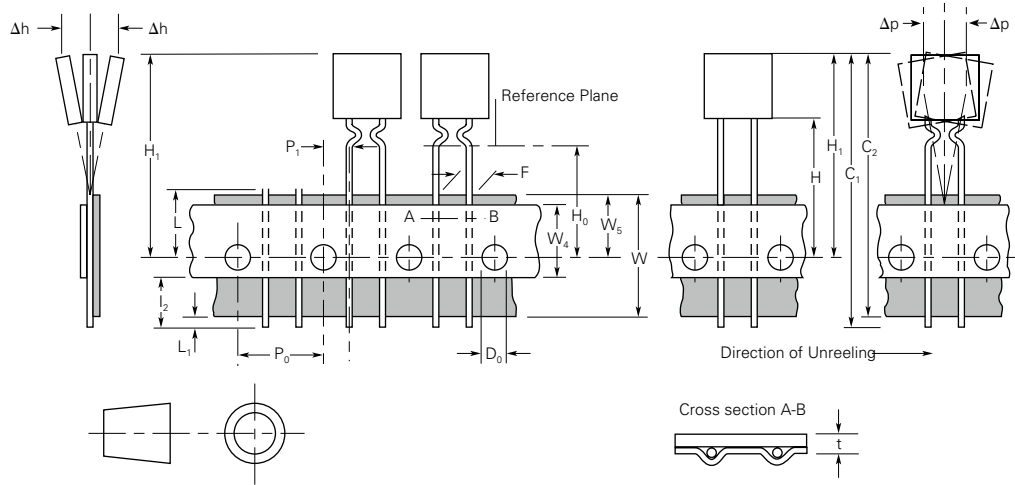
Reel Dimensions for PolySwitch Telecommunications Radial-Leaded Devices
